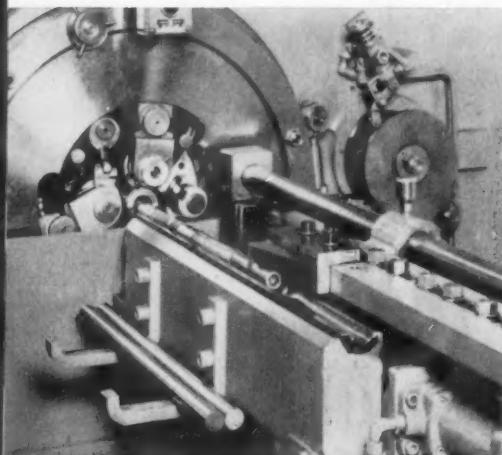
Self-indexing fixture for multi-position rolling and serrating on shafts.
